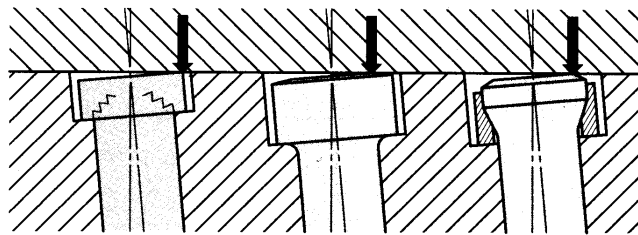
(l) flat head may cause bending fatigue, (m & r) taper on heavy load shoulder punches and tapered head punches reduce the problem¹
